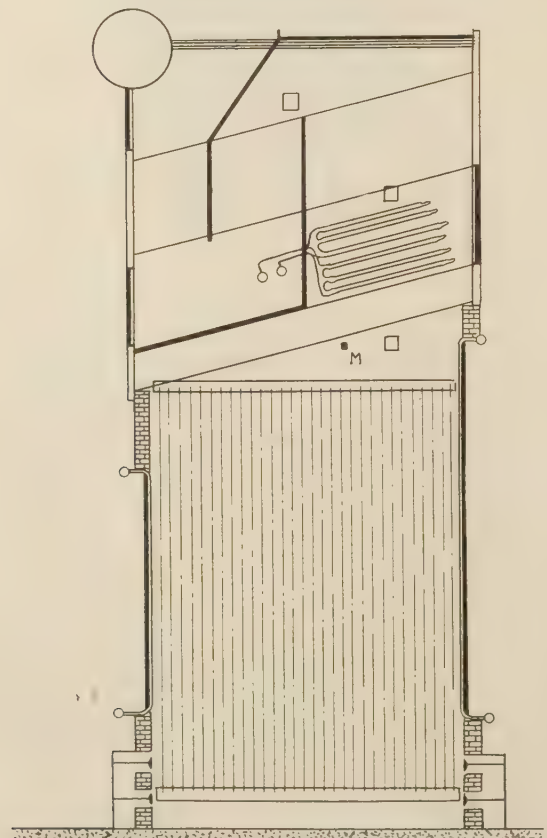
GAS-FIRED BOILER WITH FURNACE COOLED ON FOUR SIDES
